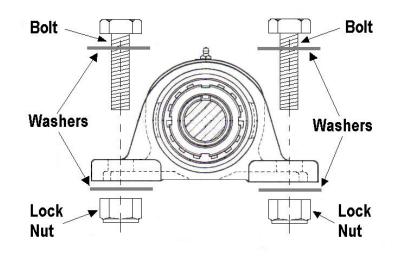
Bearing Housing with Nuts, Washers, and Bolts
